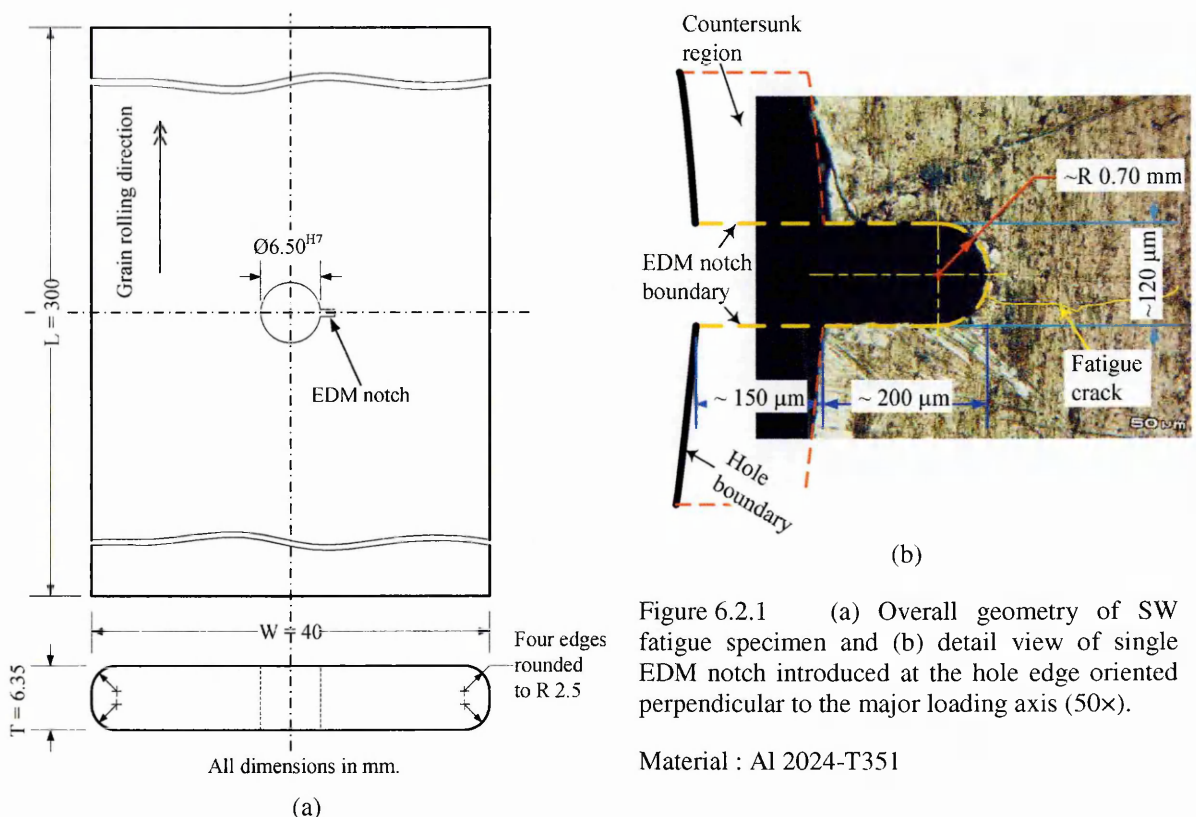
(a) Overall geometry of SW fatigue specimen and (b) detail view of single EDM notch introduced at the hole edge oriented perpendicular to the major loading axis (50×).
